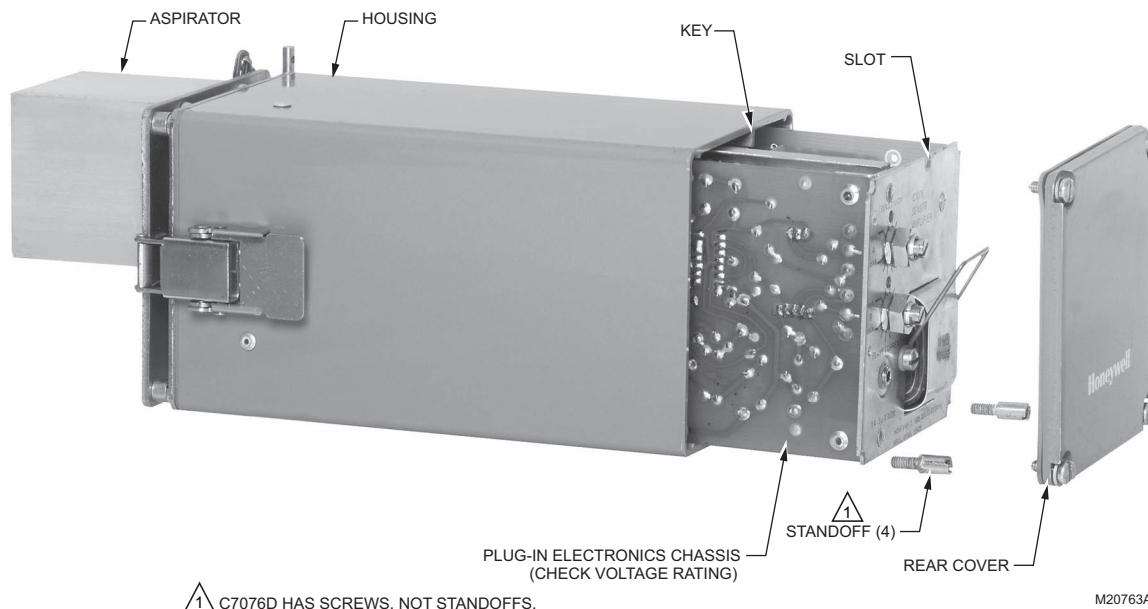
Replacing the plug-in electronics chassis in the C7076 Flame Detector.
